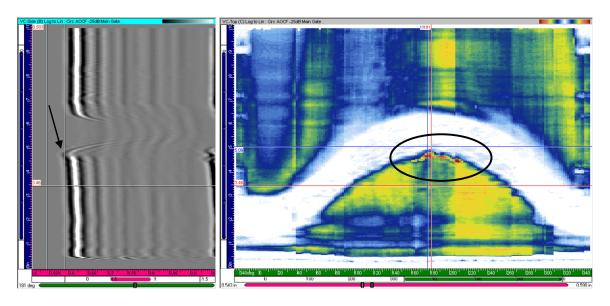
Weld Intrusions in Nozzle 57
